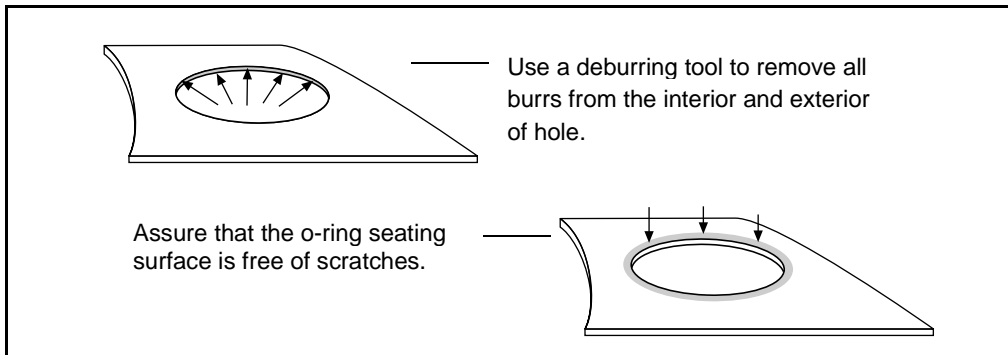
Burr Removal and O-Ring Seal Surface Inspection
